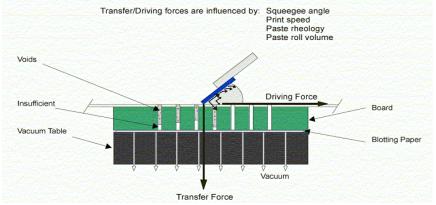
Hand Fill Application, with the Board Tapped to a Vacuum Table using a Clear Mylar® Template
